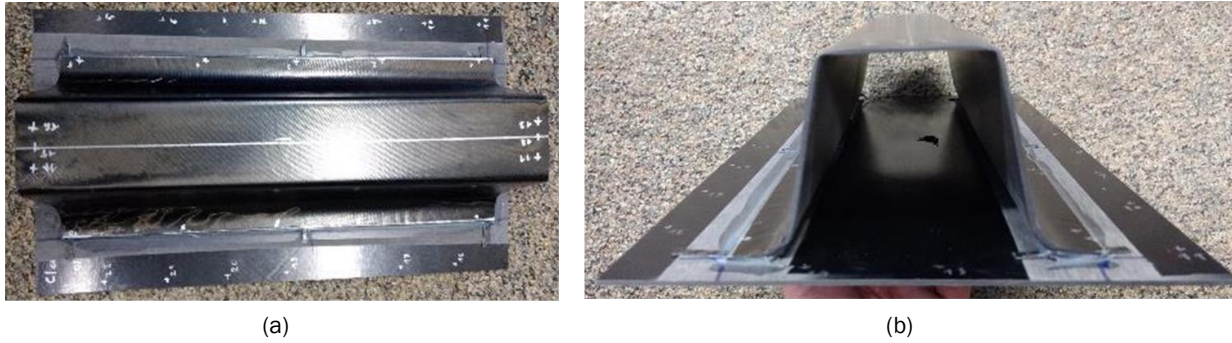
Completed subcomponent assembly after adhesive-bonding: (a) top view; and (b) end view.
